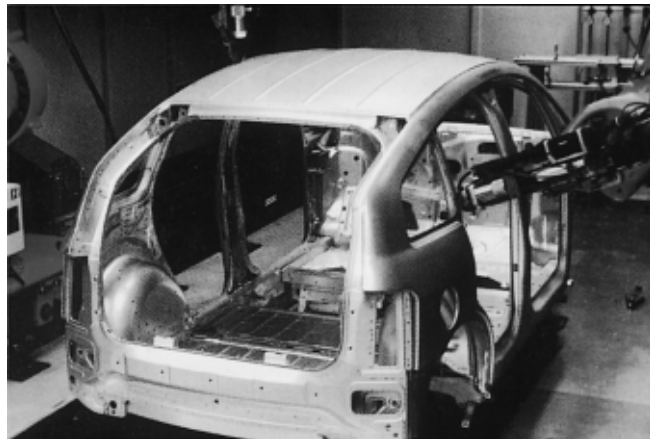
Alloy 4043 is one of the most widely used weld wires used in applications such as this automated welding of an auto body structure.
